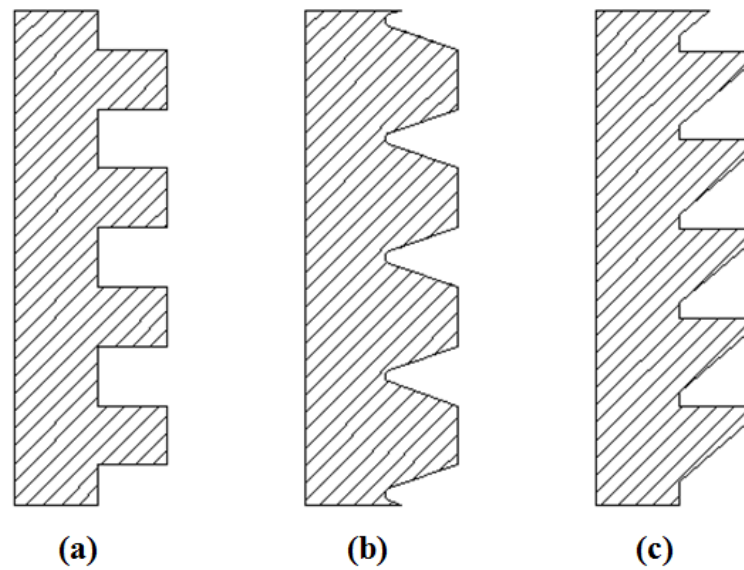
Different thread shapes: a) Square thread, (b) V- shape thread and (c) Buttress thread form (Triangle).
